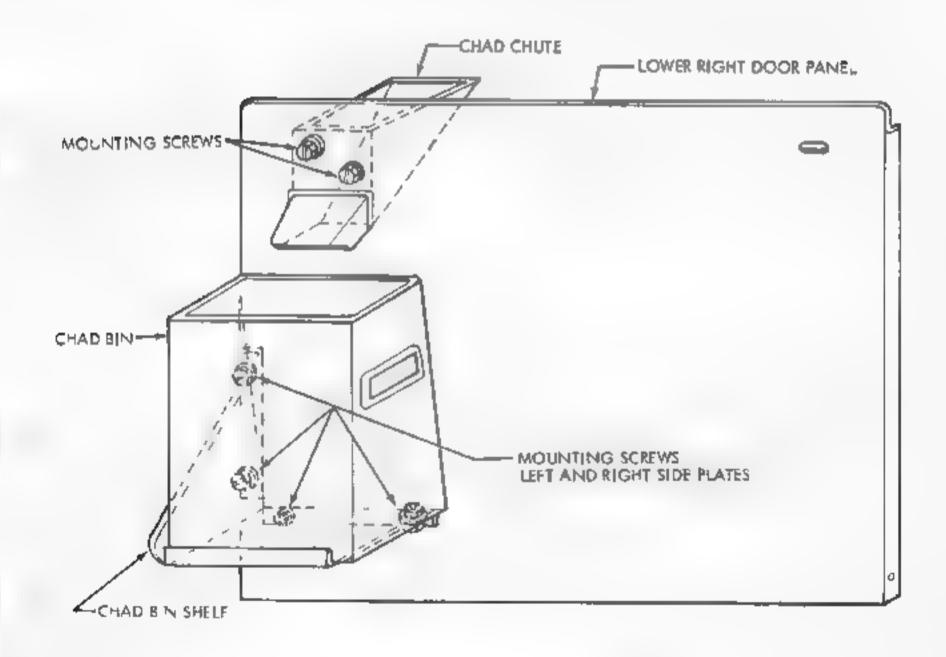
CHAD CHUITE AND CHAD BIN ASSEMBLIES -AUTOMATIC SEND-RECEIVE SET
